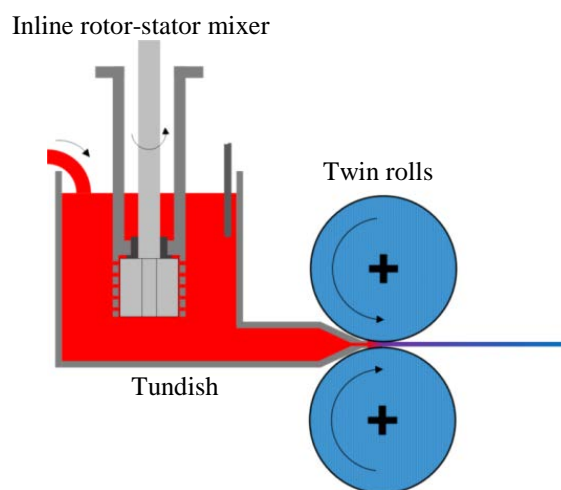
Schematic illustration of Melt Conditioned Twin Roll Casting (MC-TRC) process for thin gauge Mg alloy strip incorporating rotor-stator high shear technology.
